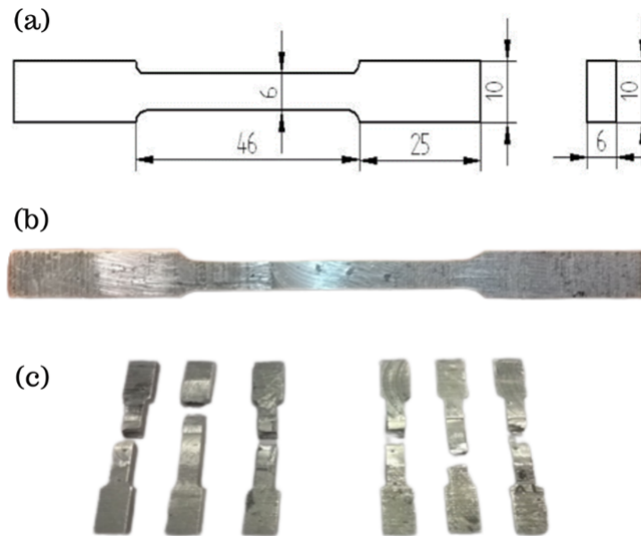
Tensile test specimen: (a) standard dimensions used for specimen preparation; (b) sample tensile specimen; (c) fractured tensile specimen.
